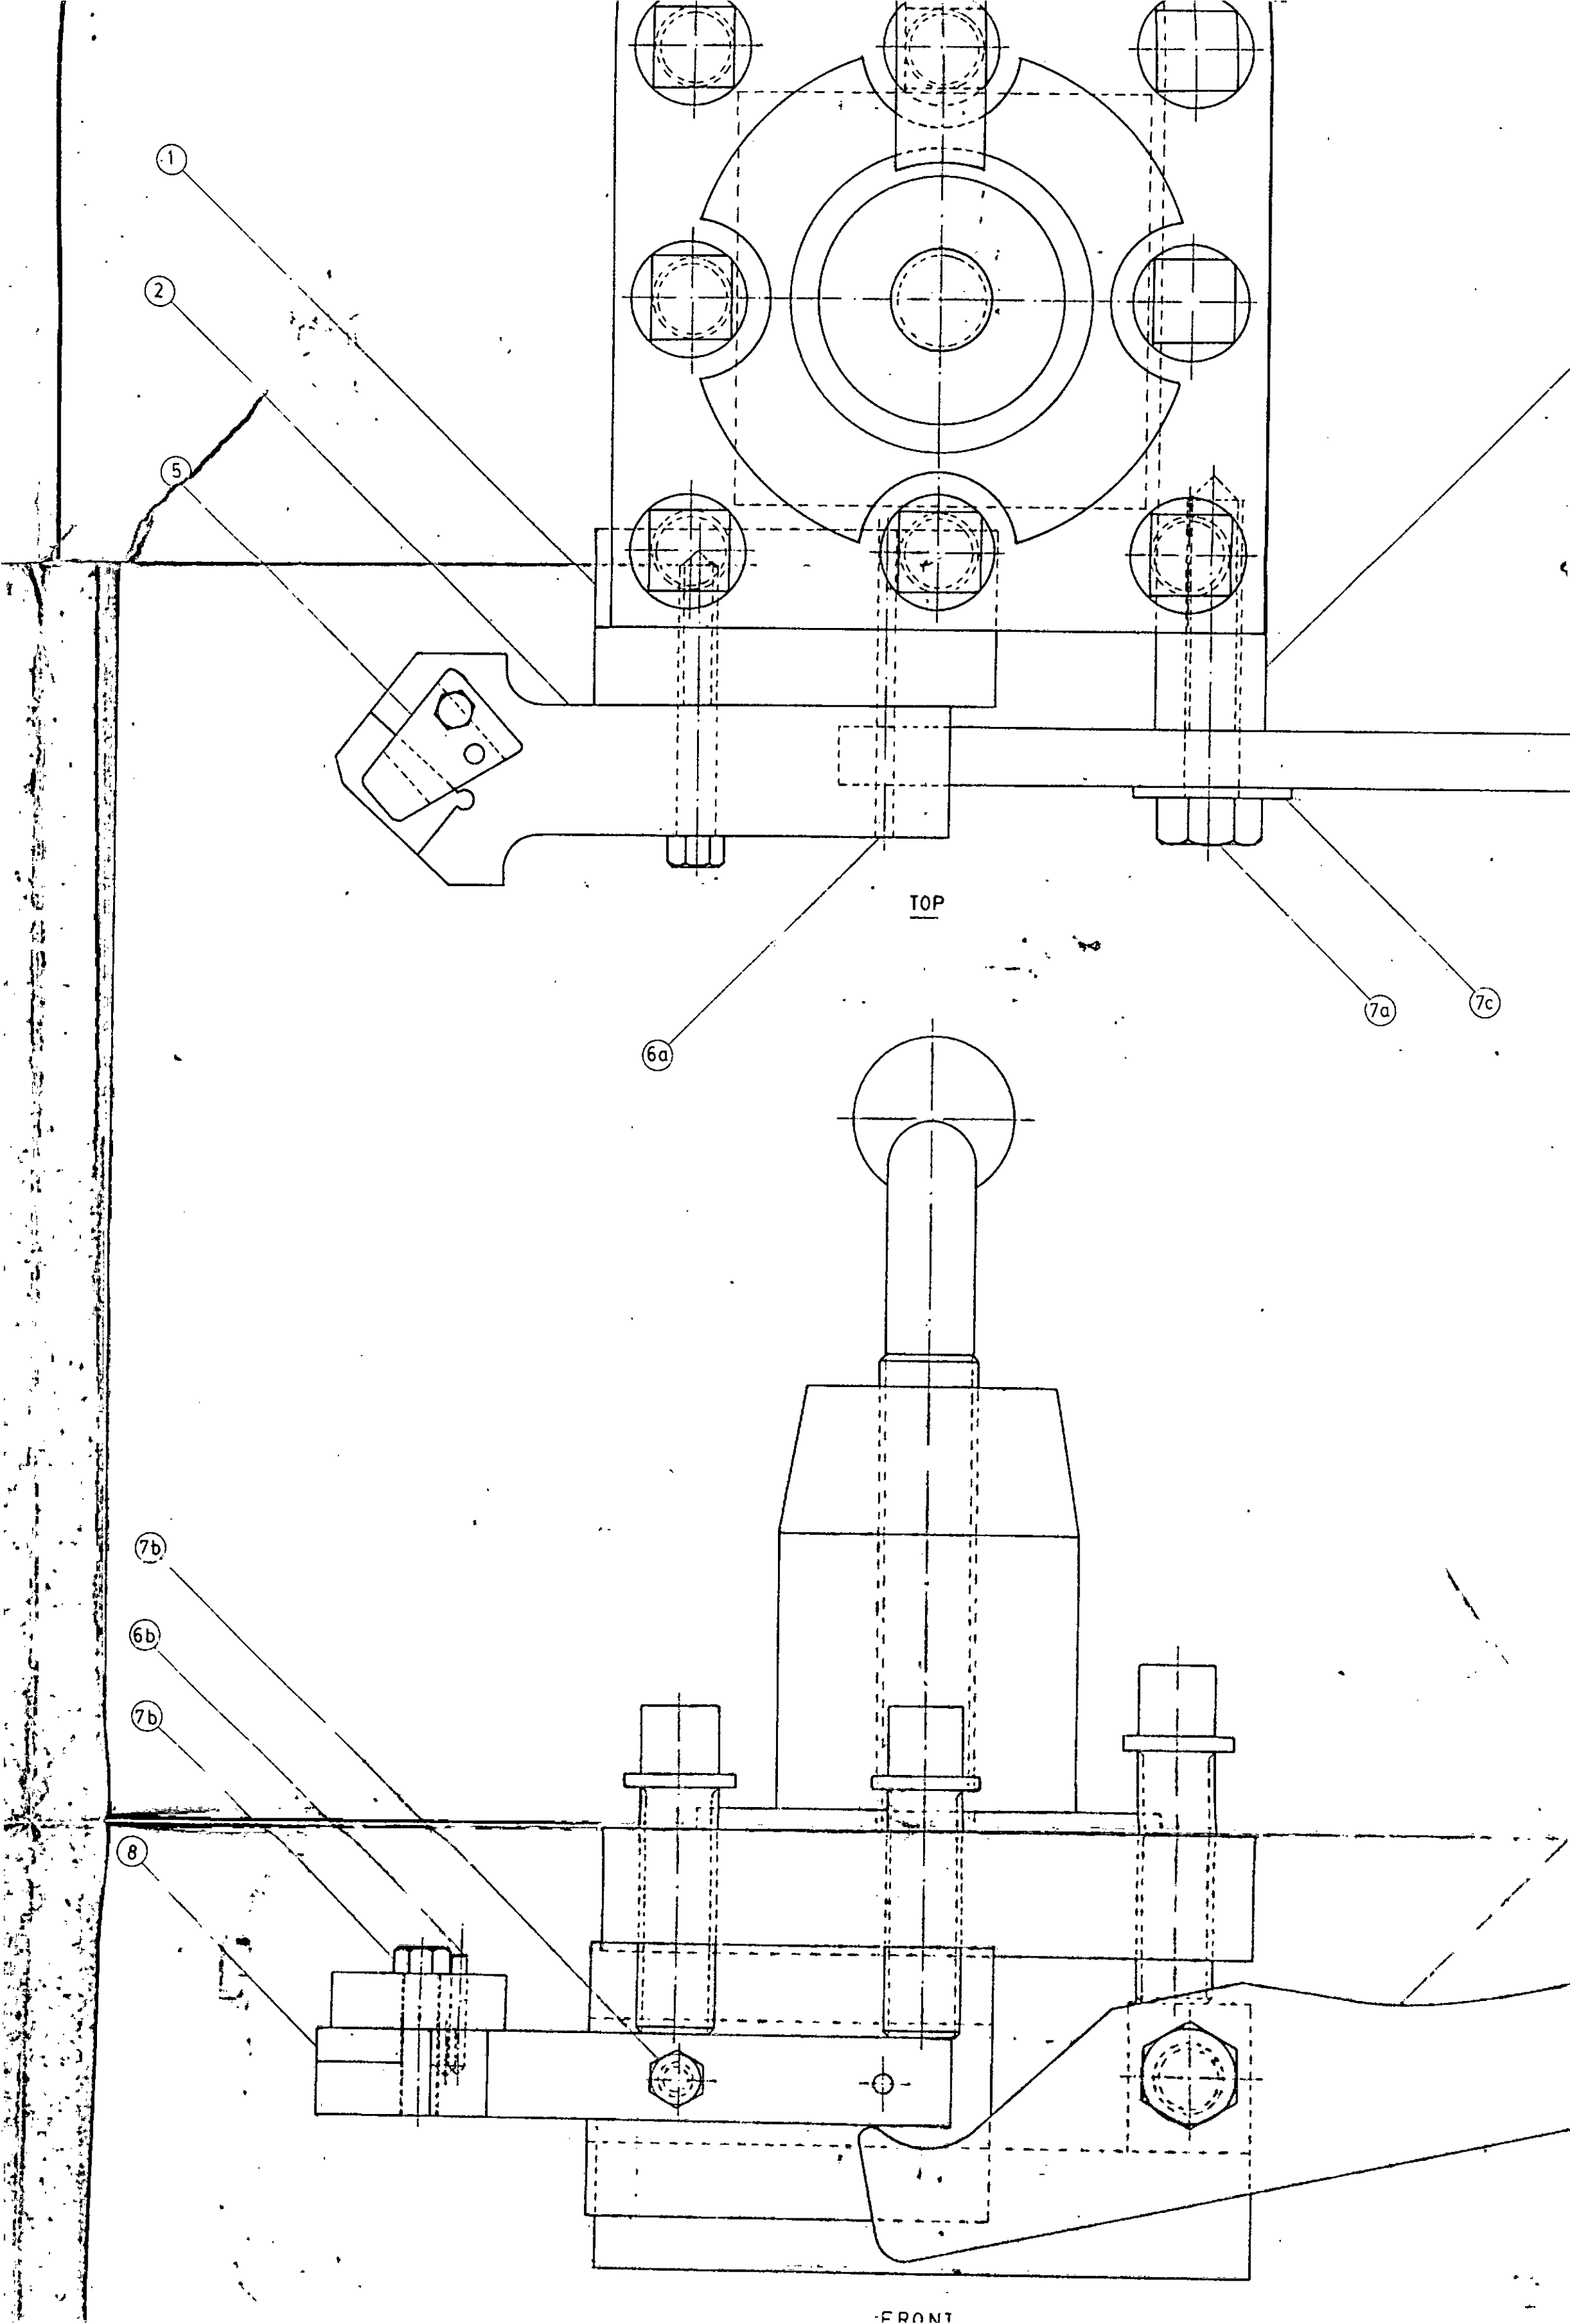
shows the assembly drawing of the apparatus fitted in the lathe-turret.
